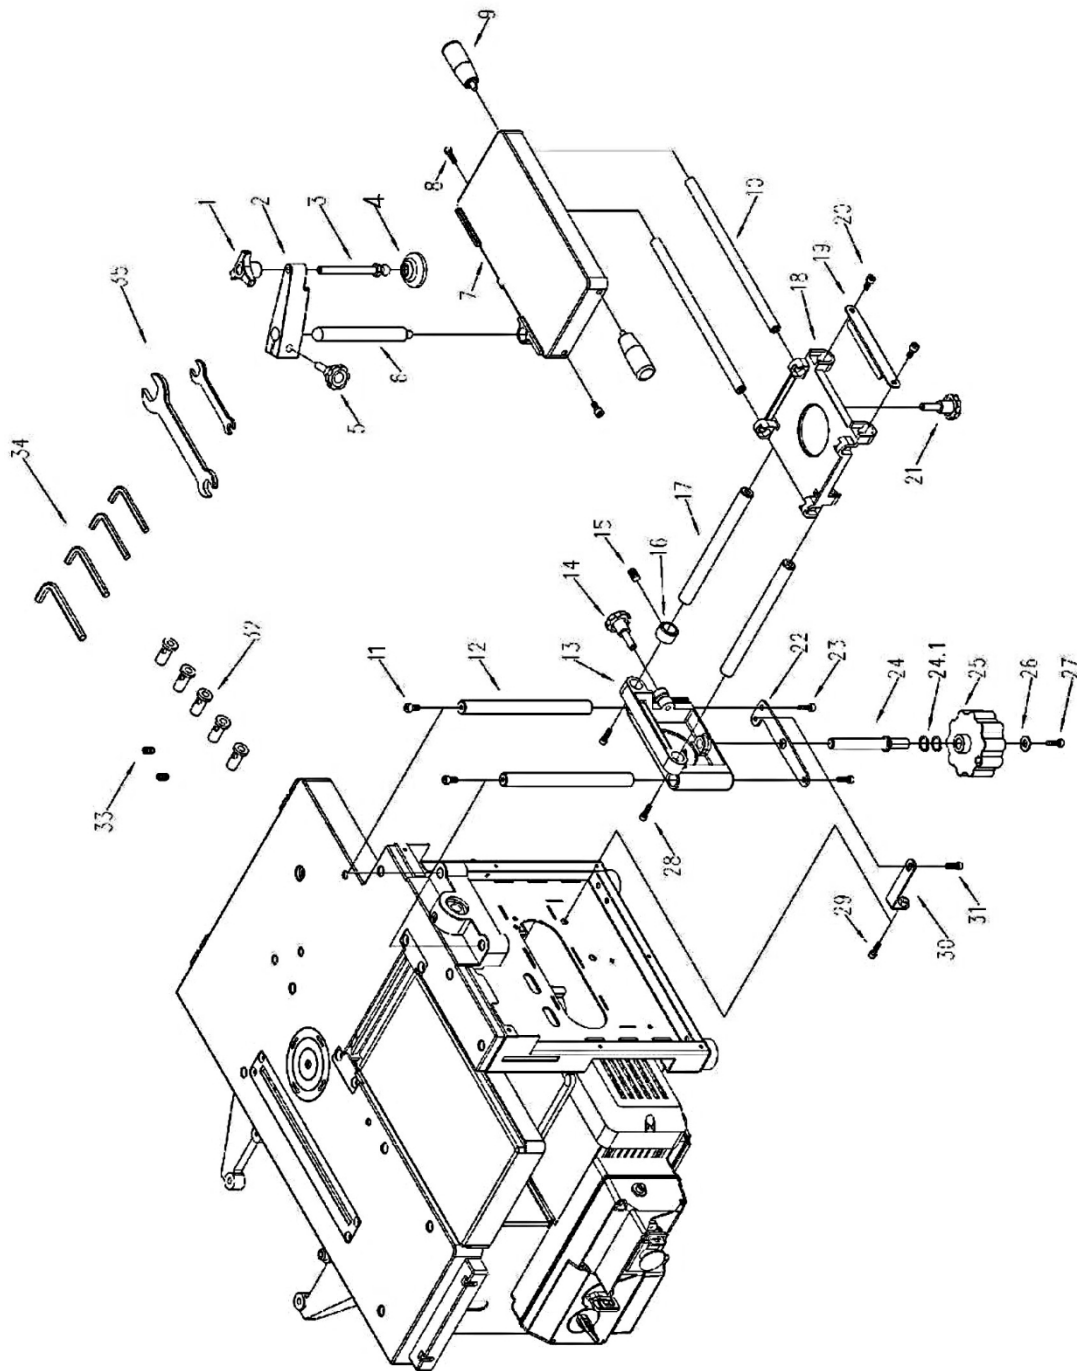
Spare parts drawing 5 Universal multiple combination machine UMK 6
